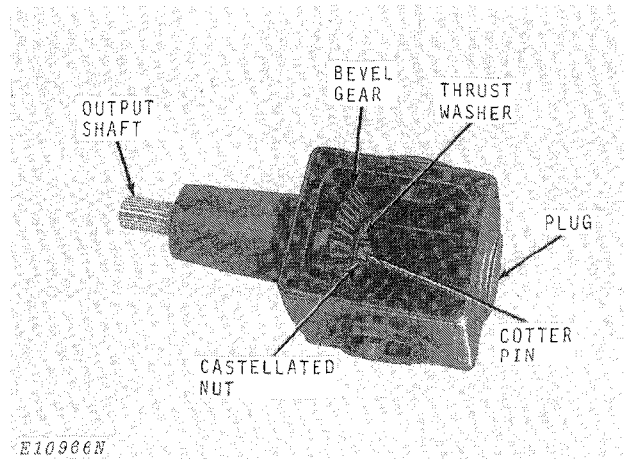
Removing Cotter Pin, Castellated Nut, Thrust Washer, and Bevel Gear from Output Shaft
